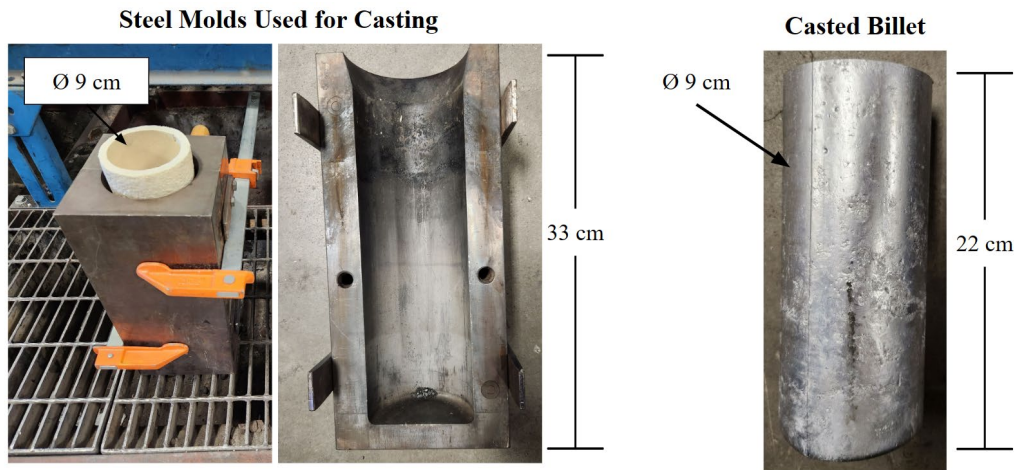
The steel mold used for casting the extrusion billets and an image of the as cast billet.
